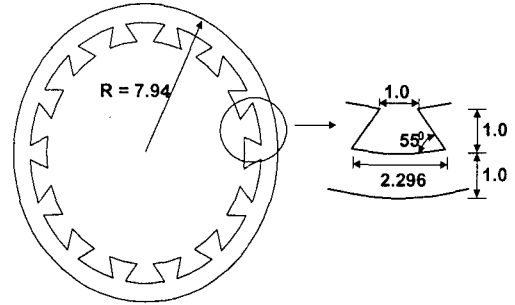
Cross-section of a heat pipe fabricated by drawing (material: AL1050, 단위: mm).
